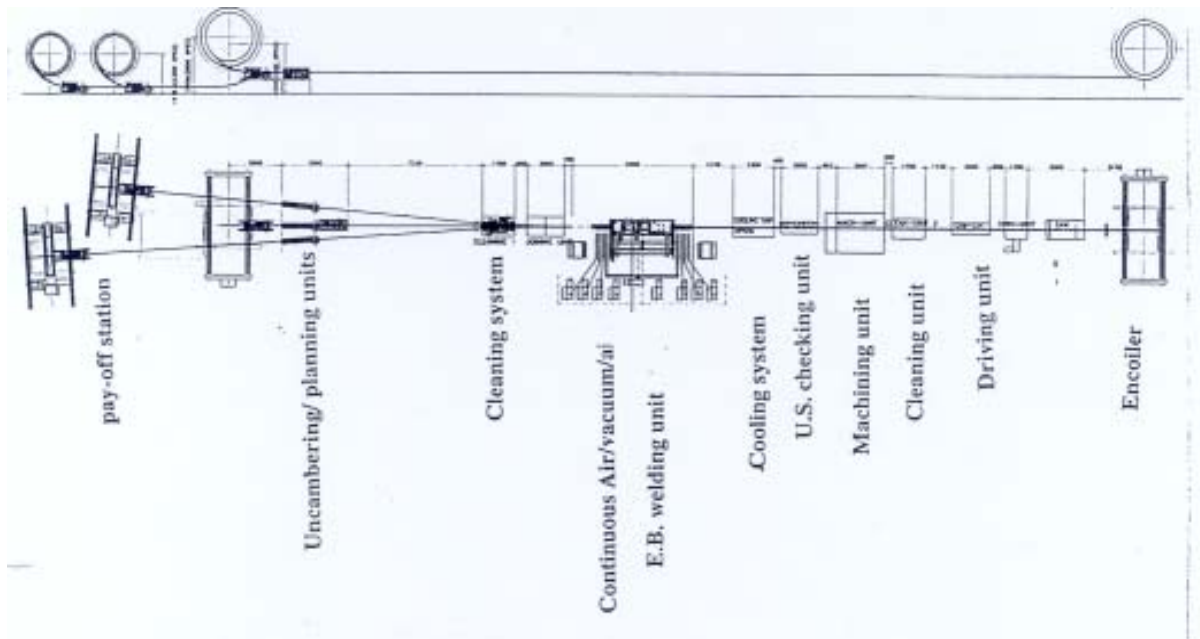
Schema of the 60000 mm length air-vacuum-Air EB welding line
